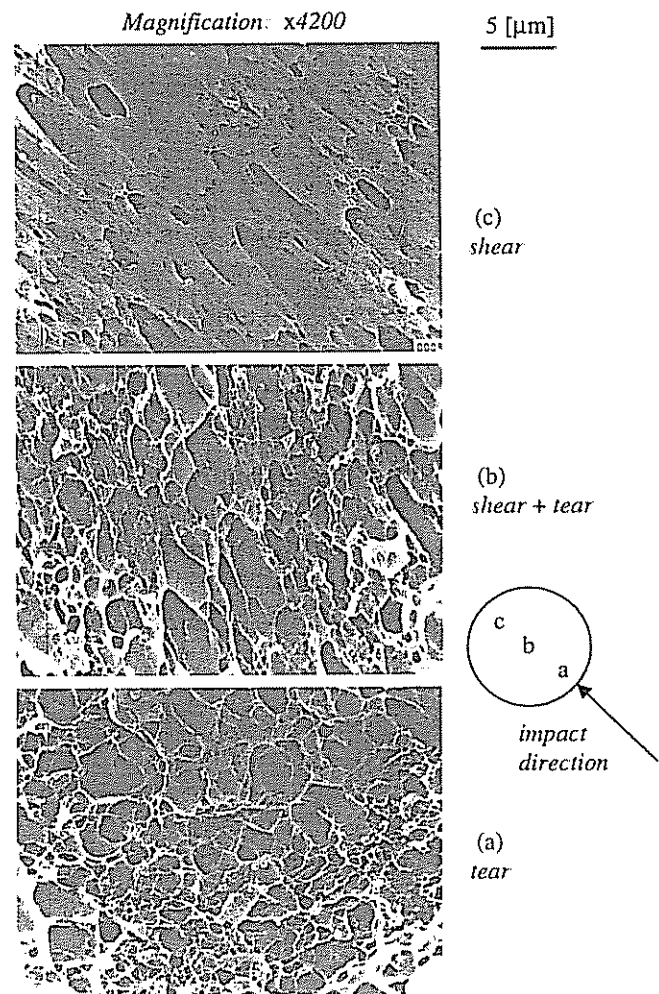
Typical SEM fractographs of fractured M4 carbon steel screw head: (a) at the impact entrance side (b) at the center of fractured area (c) opposite to the impact side
